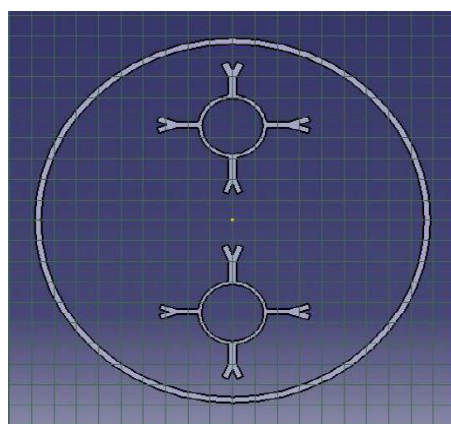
2D model of shell and tube with 4 Y shaped fins.
